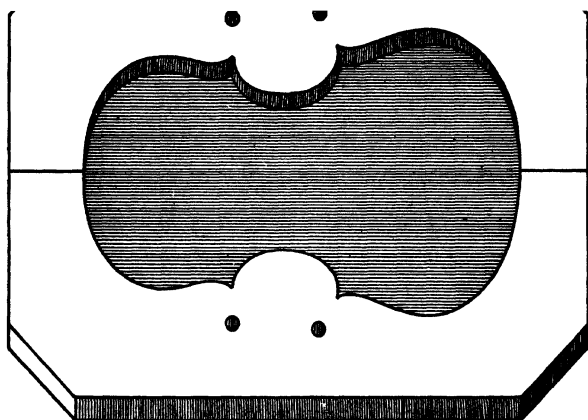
Outside Mould with Cut-out part shown Shaded.
